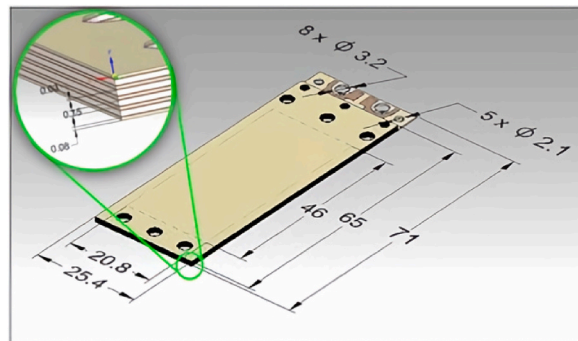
CAD model showing the dimensions of the piezoelectric cantilever.
